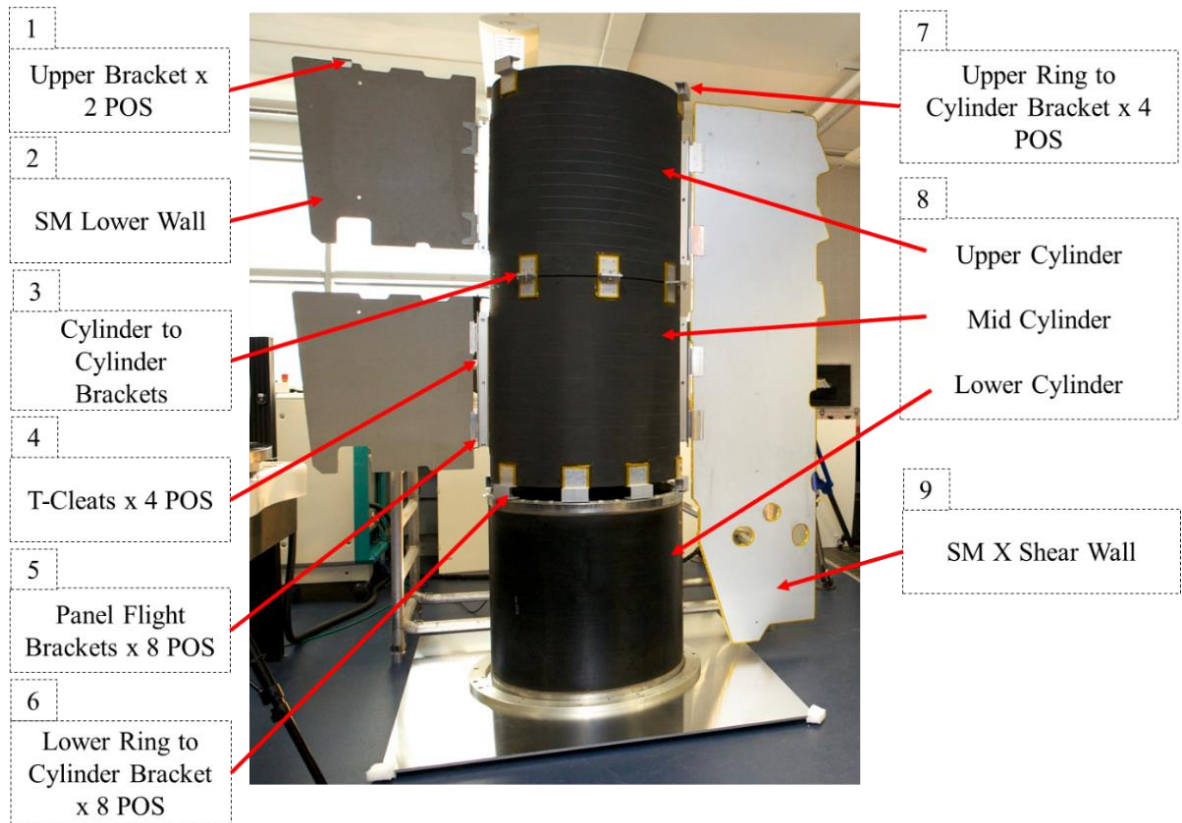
Technology Demonstrator - Fully assembled SM representative structure.
